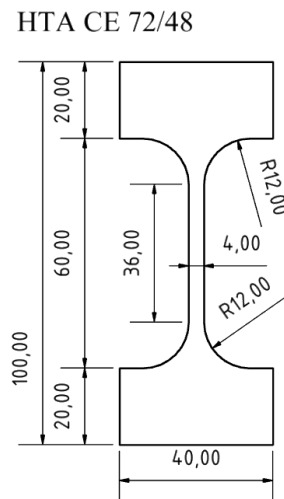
Flat tensile test specimen - Rail and anchor
